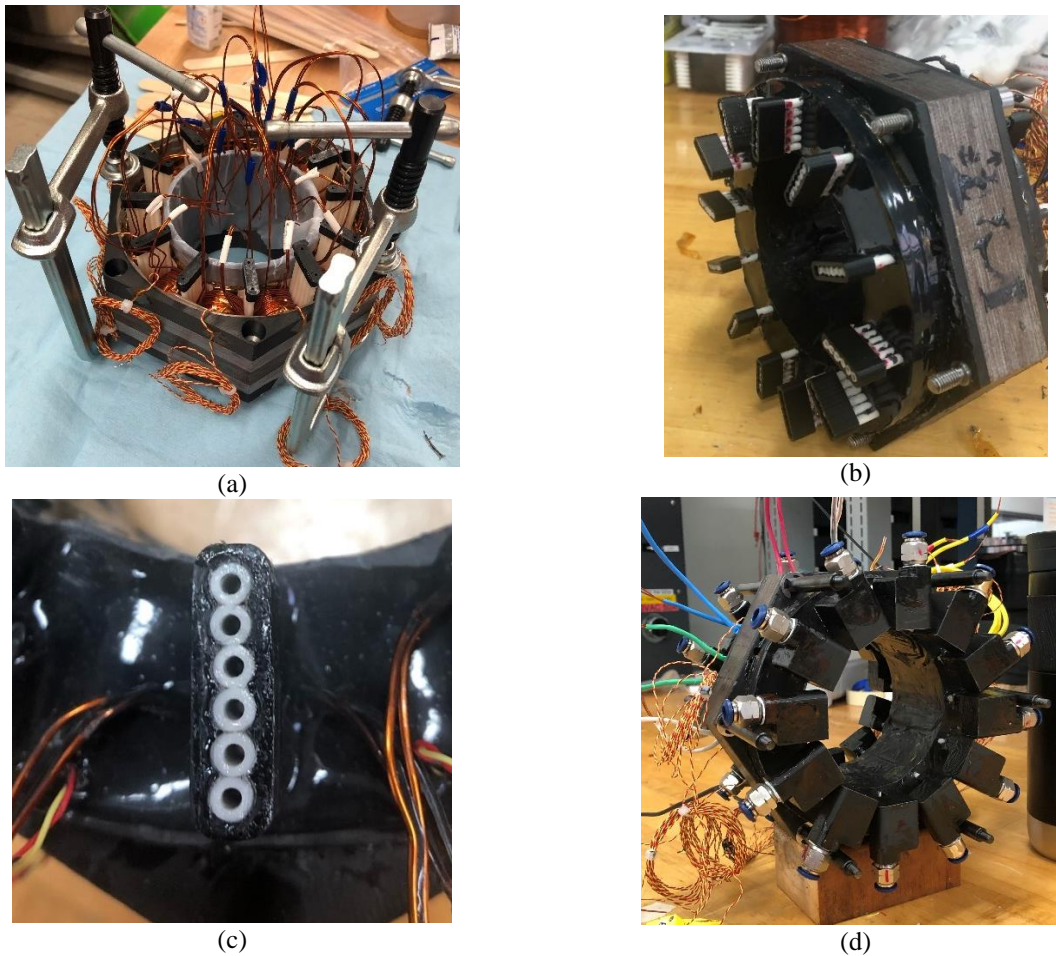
Cooling assembly fabrication steps: (a) alumina tubing insertion into the stator and potting assembly fixturing; (b) post cure potting result; (c) endpiece 1 (EP1) attached to end of alumina tubes; and (d) final stator assembly with cooling endpiece 2 (EP2) and quick disconnects installed.
